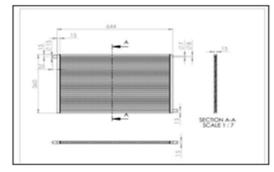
Dimension Drawing Sheet of Automotive Radiator
